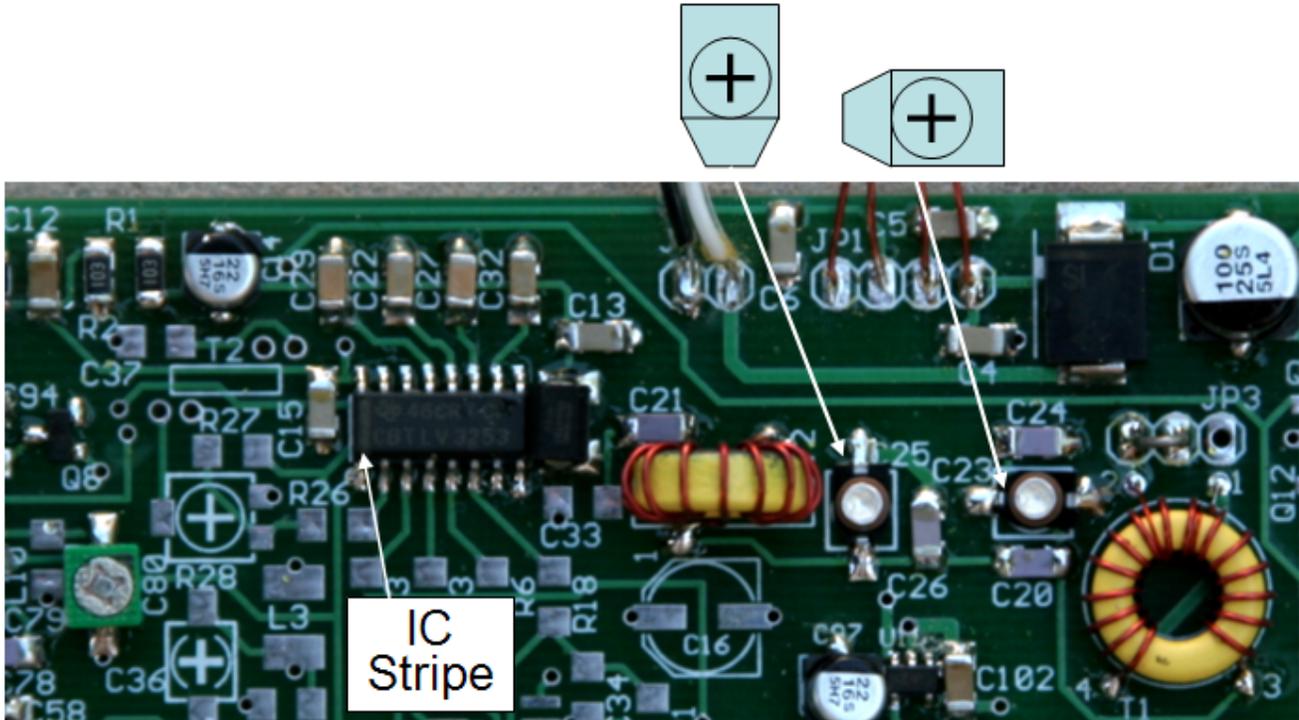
Picture of detector and RF front end with parts installed. Note trim cap orientation and jumper on JP3!
